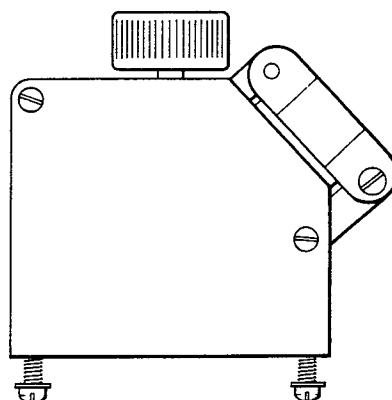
Backshell 45 deg opening (recessed jackscrew)
